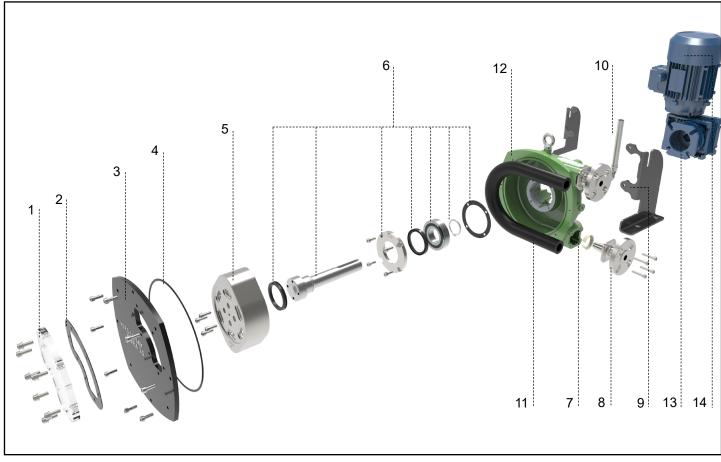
Dura MK III 15, 25 and 35 Exploded View (Generic View)
